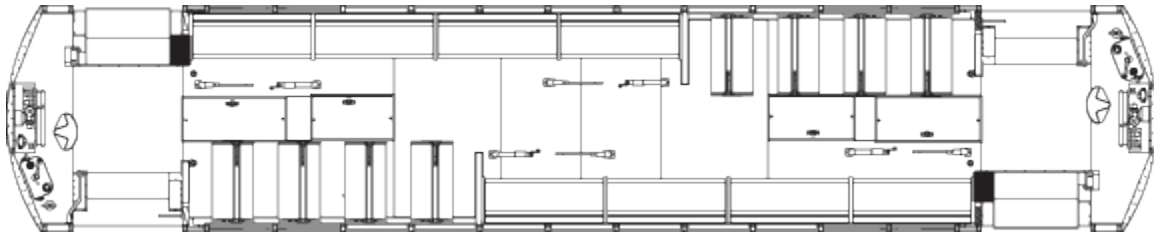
Plan View of Birney Trolley Car Floor Plan
